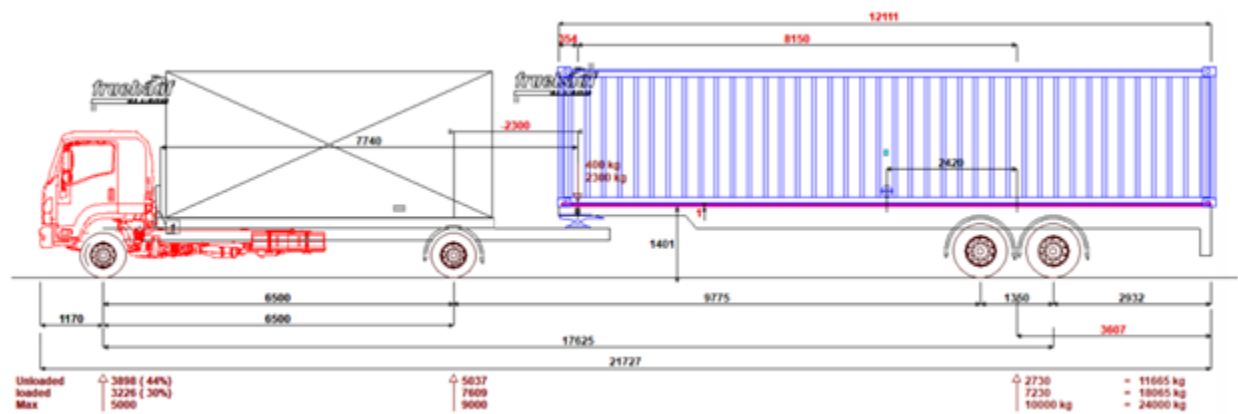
Container truck and trailer dimensions (courtesy of Fruehauf)
